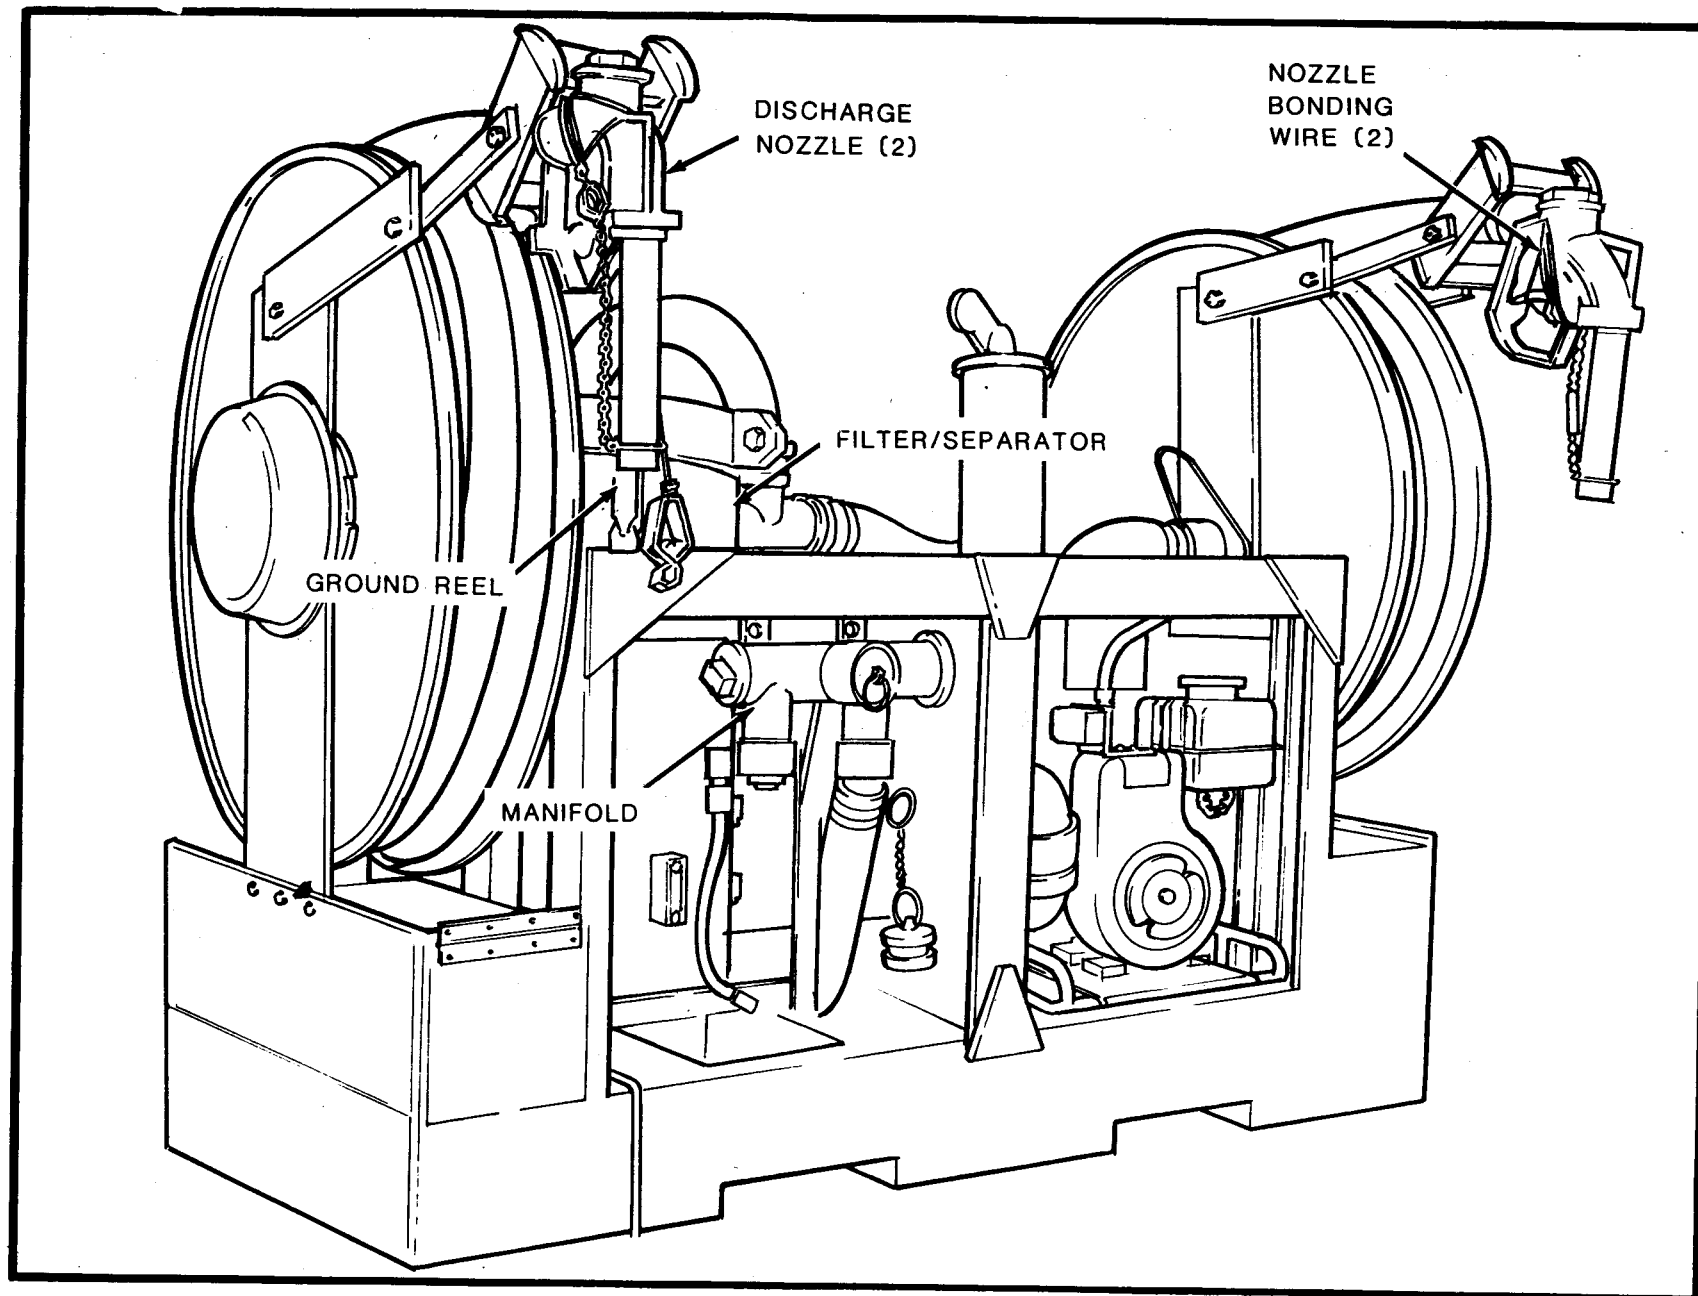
Pumping assembly, front and rear, three-quarter view. (sheet 1 of 2).
